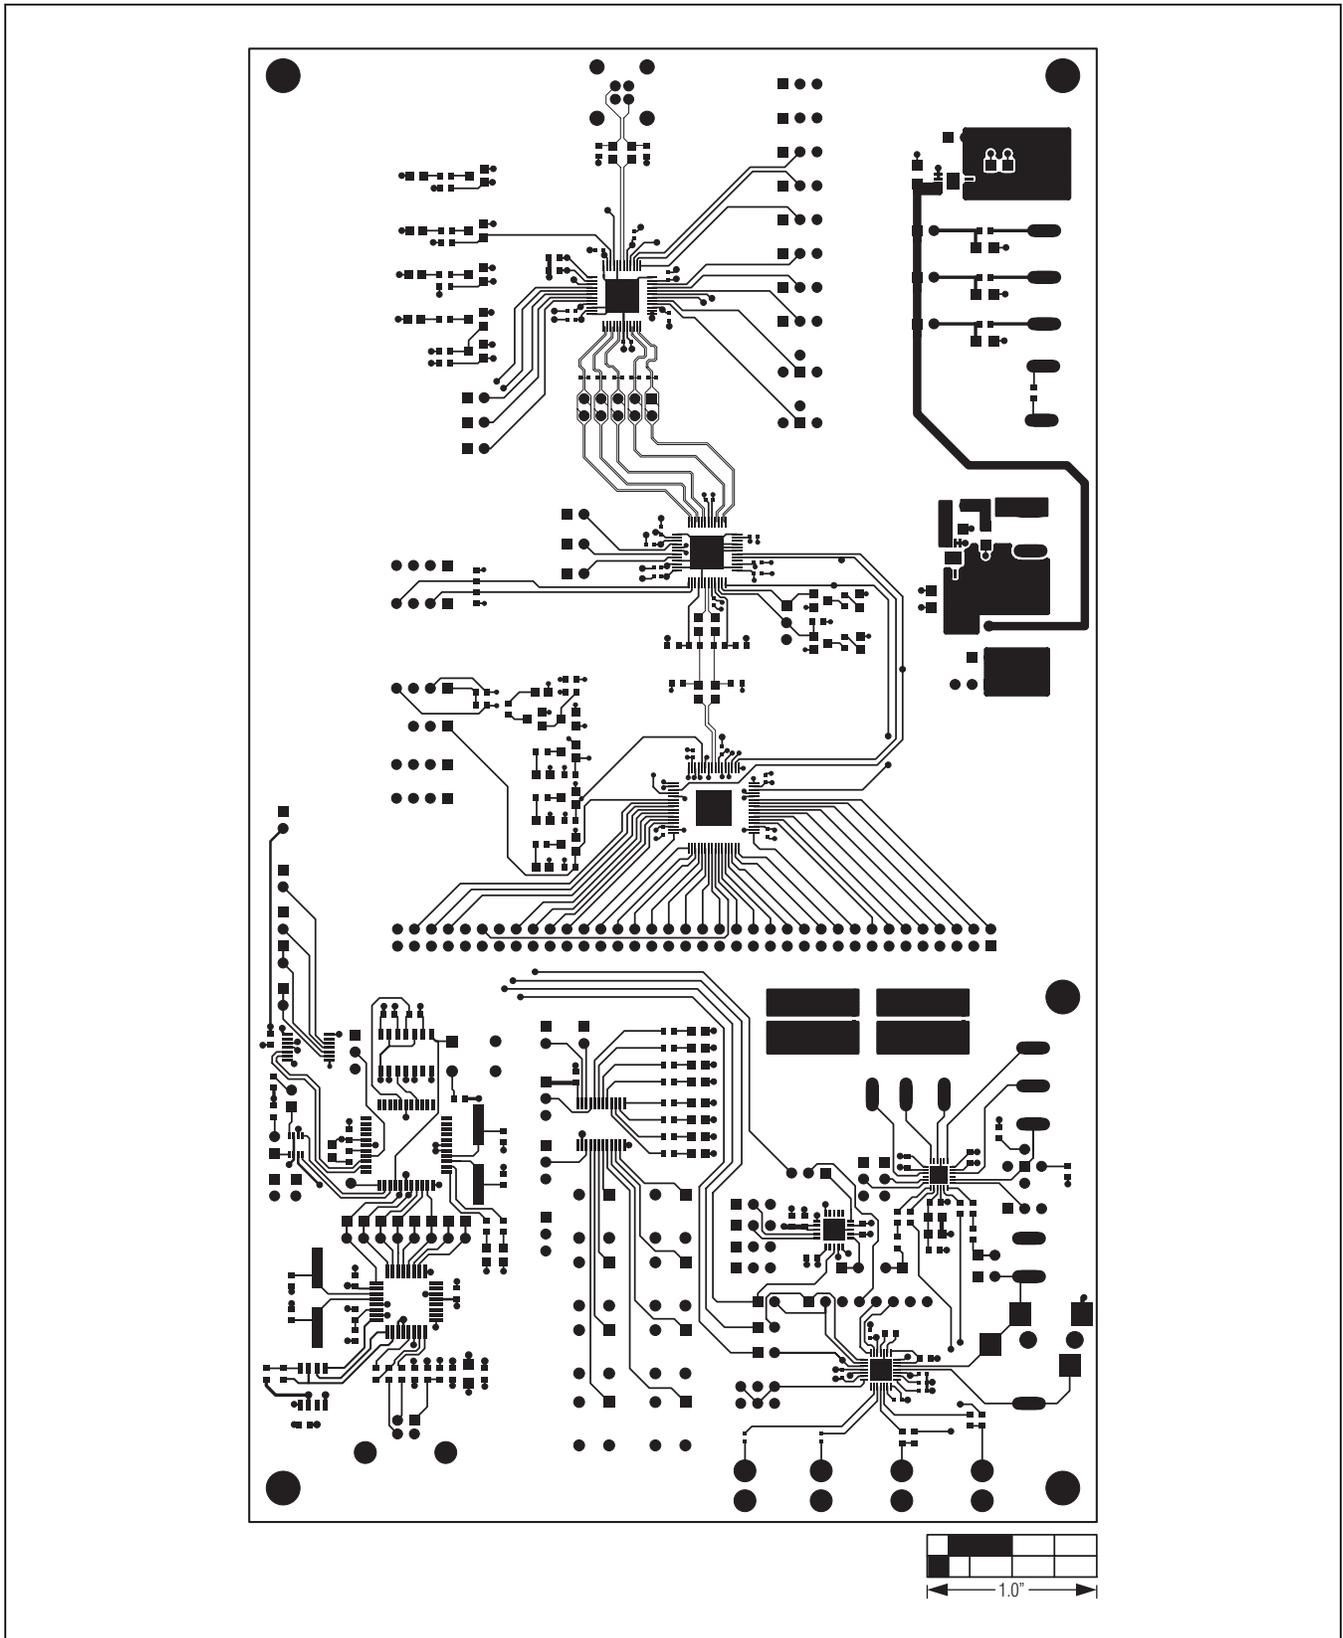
MAX9266 EV Kit PCB Layout—Component Side
